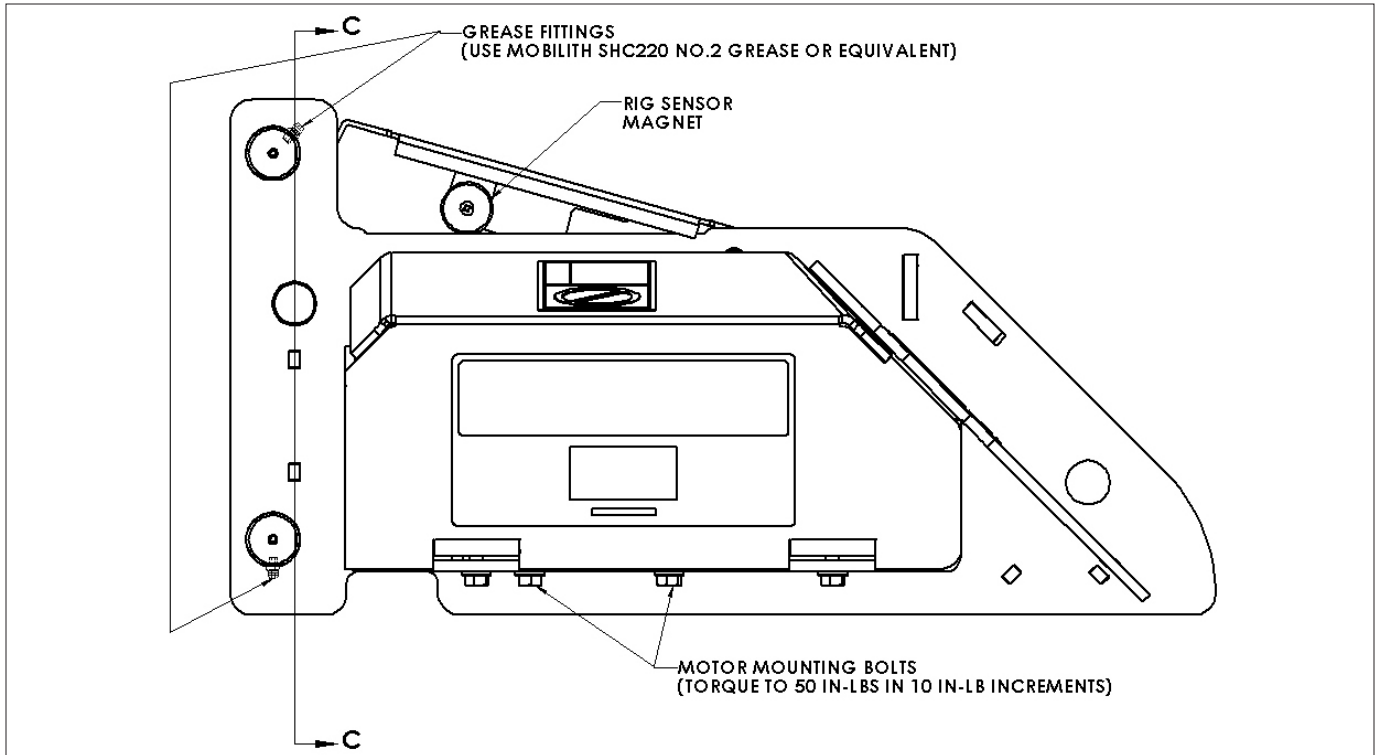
FIGURE J—GREASE FITTING, RIG SENSOR MAGNET & MOTOR MOUNTING BOLT LOCATION
